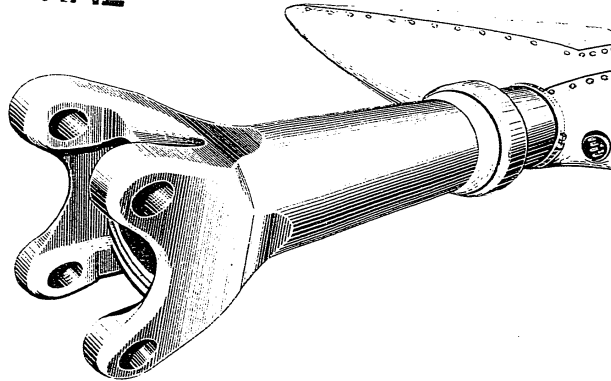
BLADE ROOT ATTACHMENT FITTING.
